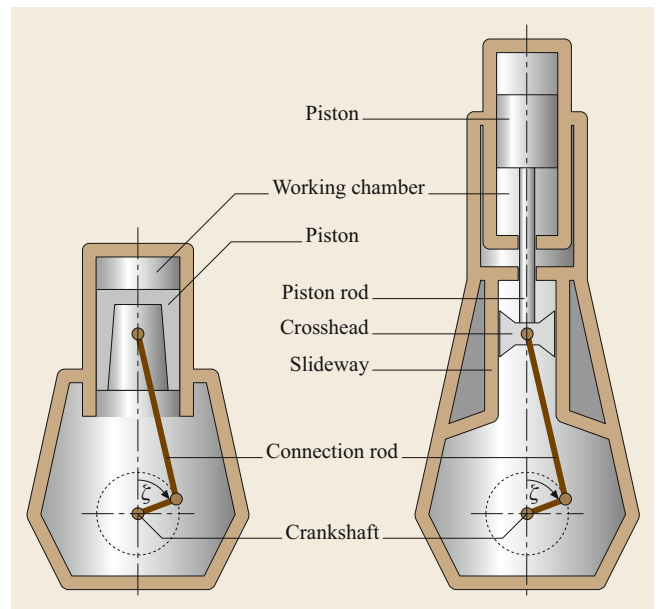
Plunger piston and crosshead crankshaft drive (after [17.6])
